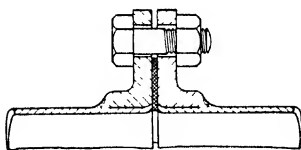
FLANGES WELDED ON AT BACK, WITH PIPE ENDS EXPANDED AT FACE
